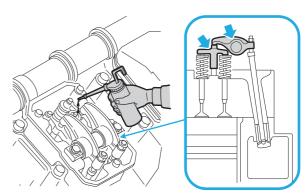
Engine Oil - Apply (Valve Mechanism)
